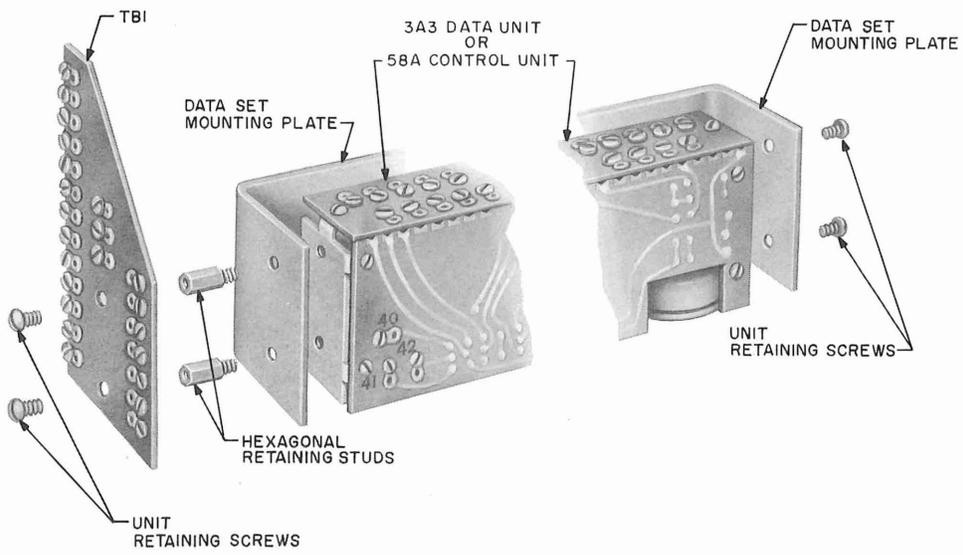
58A Control Unit or 3A3 Data Unit—Typical Mounting Detail
